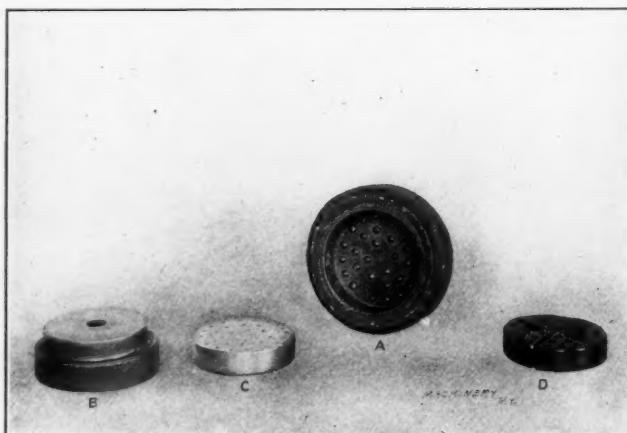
Tools for Laying Out Holes in Jaws F, Fig. 1
